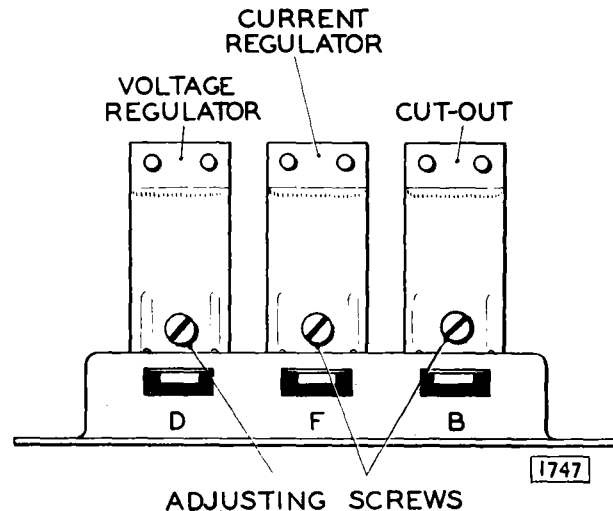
The RB.310 control box showing the position of the three spring loaded adjusting screws.
